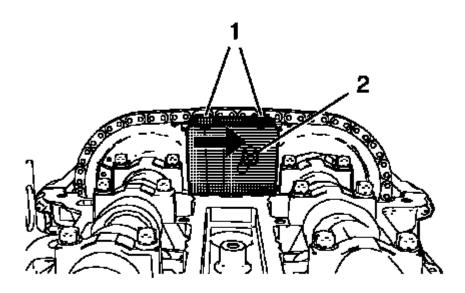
Intake Camshaft Sprocket Gearing And Special Tool Courtesy of GENERAL MOTORS COMPANY
